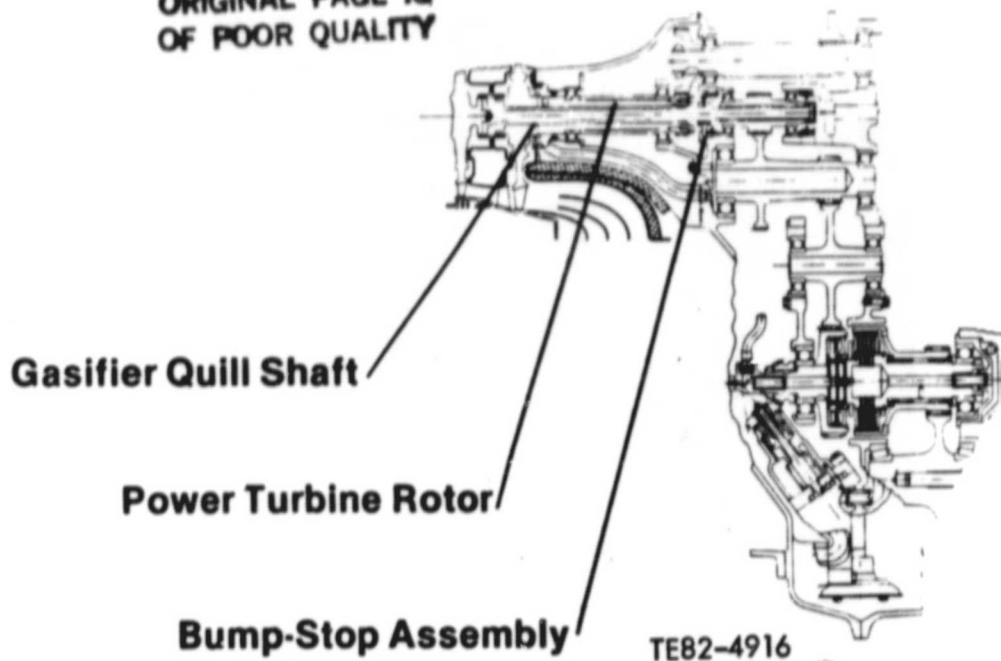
GT404-4 engine cross section showing gasifier quill shaft and bump stop.
